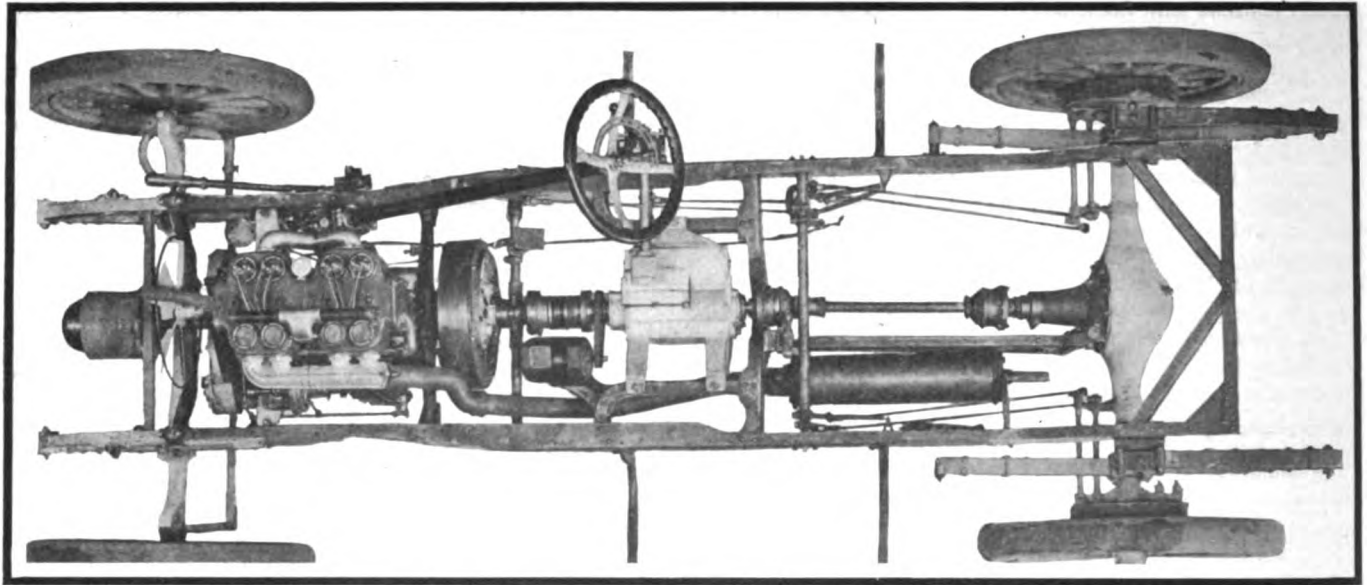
Plan view of four-cylinder, 40-horsepower Klinekar, showing mounting of Rushmore lighting dynamo and Ever-Ready self-starter
